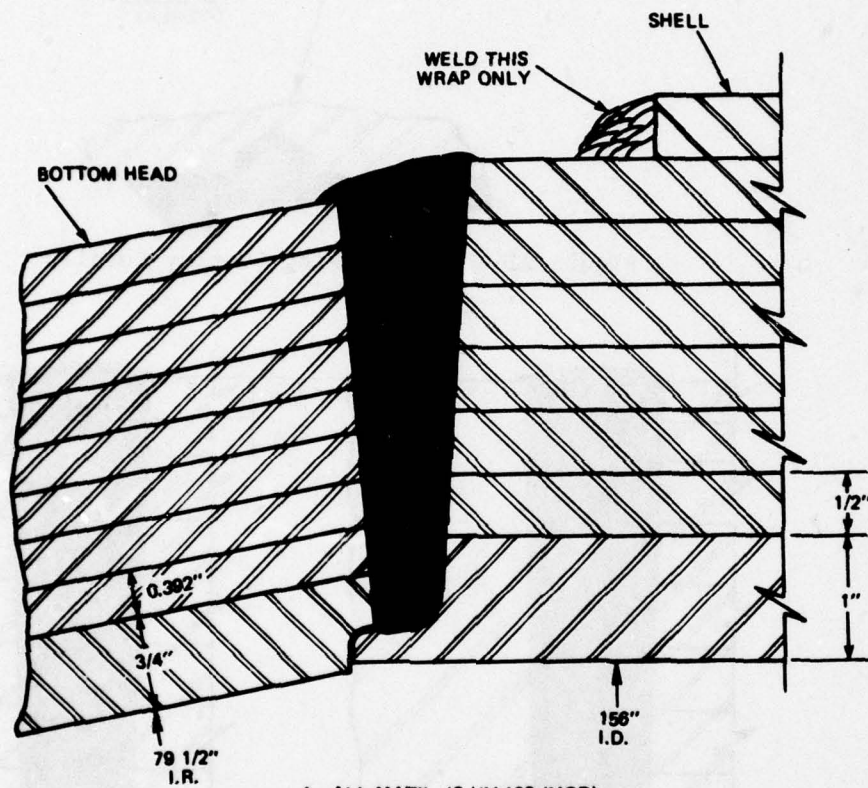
Welding Details for Circle Seams 2, 3, and 4
